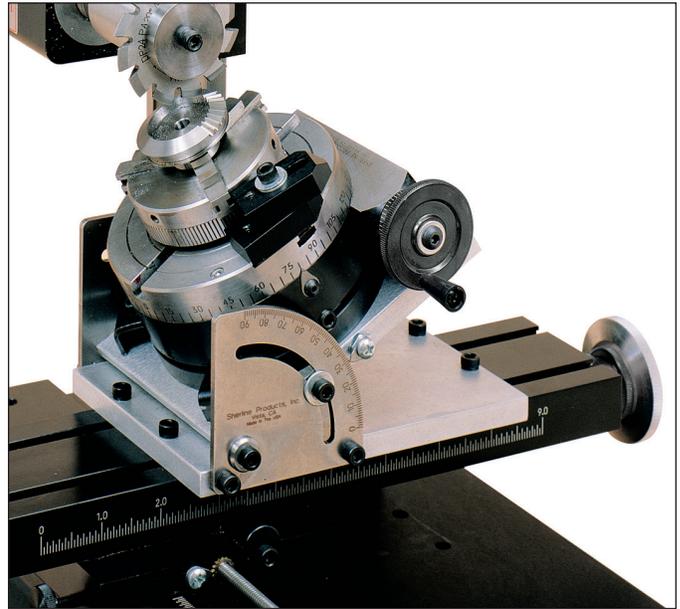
A complex setup shows a part held in a 3-jaw chuck, which is mounted to the rotary table, which is mounted to the tilting angle table, which is in turn mounted to the mill table. A mill arbor holds a gear-tooth cutter which is cutting teeth in a bevel gear. The horizontal milling conversion is used to mount the headstock in the horizontal position. With Sherline tools and accessories, the parts you machine are limited only by size, not by complexity.
